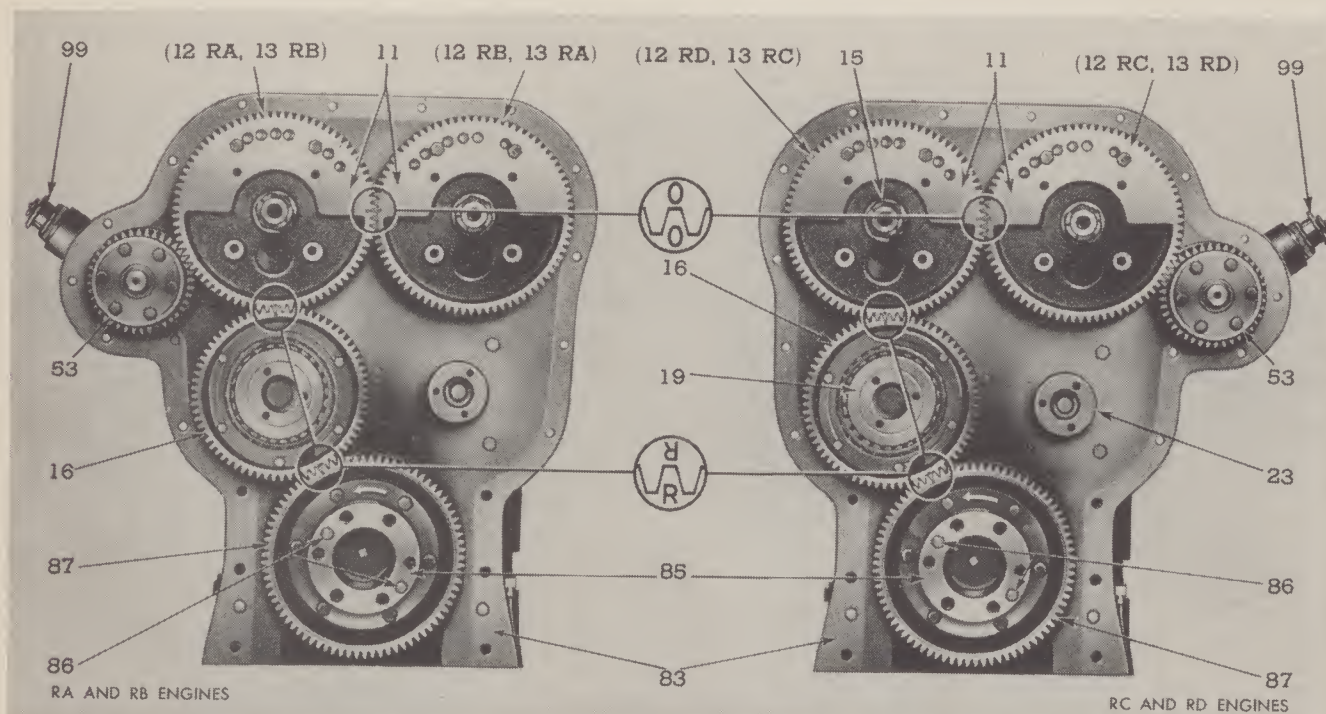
A—A GM engine gear train which is located at flywheel end of engine shows timing marks for RA and RB engines. Oliver tractors are equipped with the RB engine which has the camshaft gear (12) at the upper right and the balance shaft gear (13) at the upper left.
